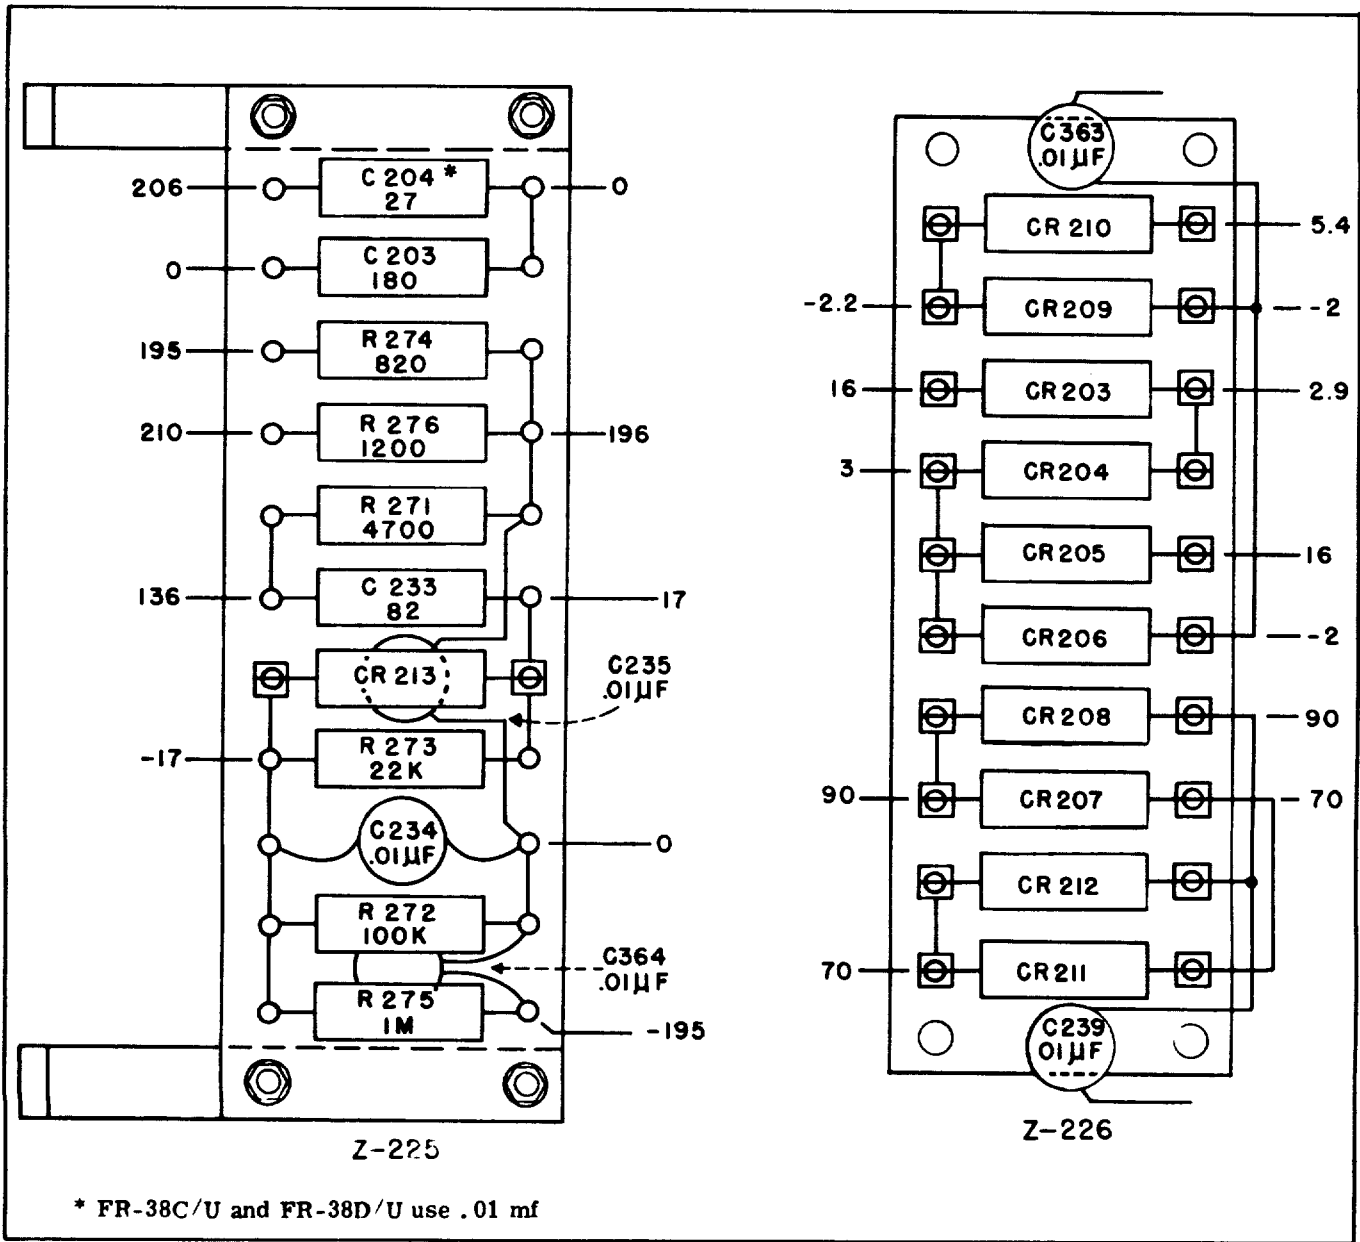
Resistor Board Drawings Z-225 and Z-226
